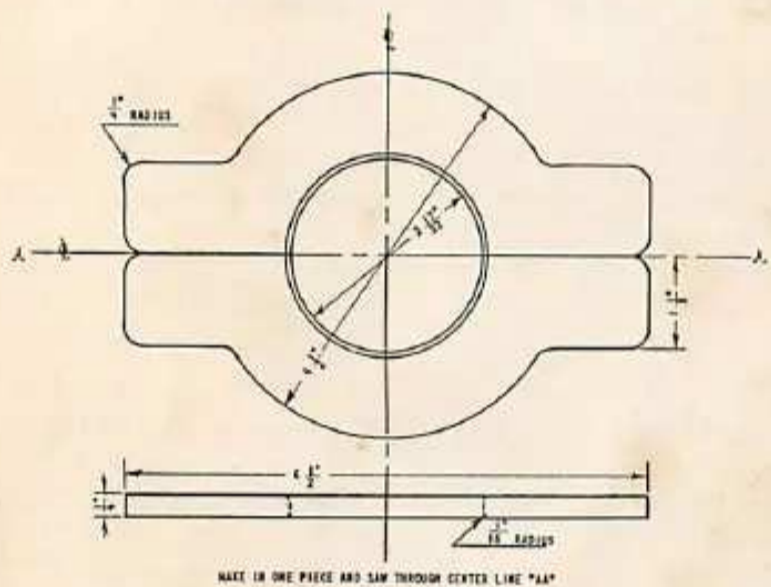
Seal installation tool can be made from piece of 1/4-inch thick steel plate. Refer to dimensions shown on drawing.
